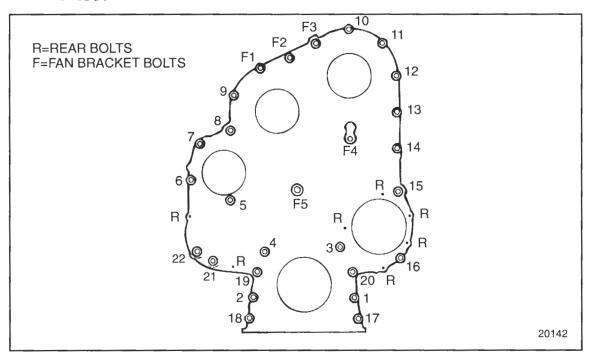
Gear Case Cover Bolt Arrangement (Front)
